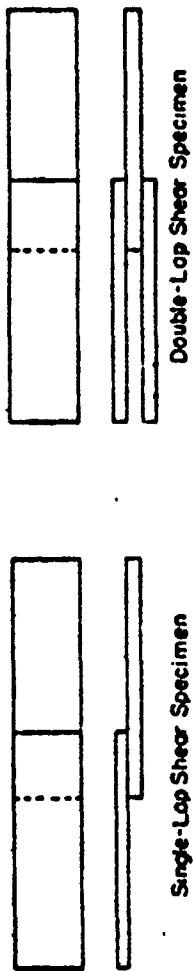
SPECIMENS FOR TESTING BRAZED JOINTS
